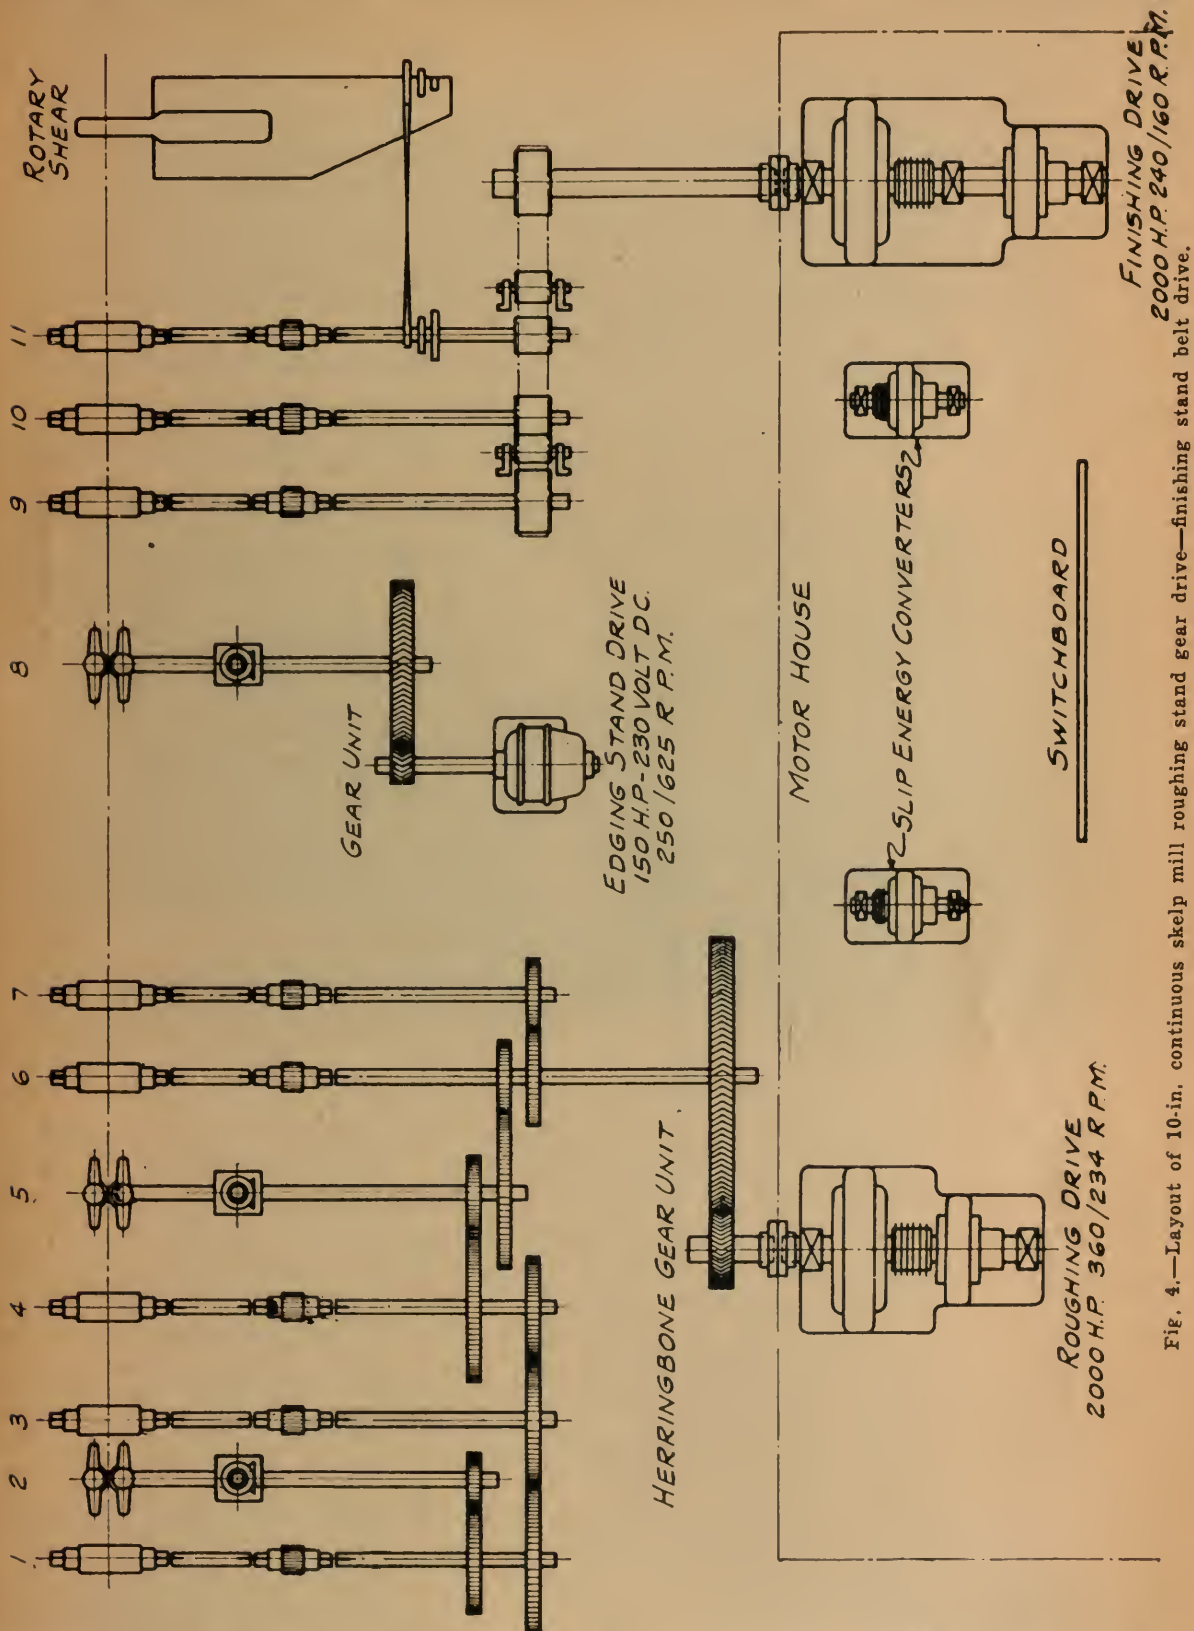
Layout of 10-in. continuous skelp mill roughing stand gear drive—finishing stand belt drive.
